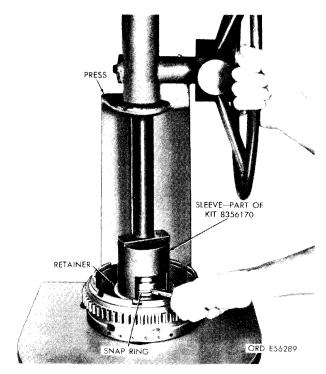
Removing high-range clutch spring retainer snap ring using sleeve (part of kit 5180-572-8607 (8356170)).
